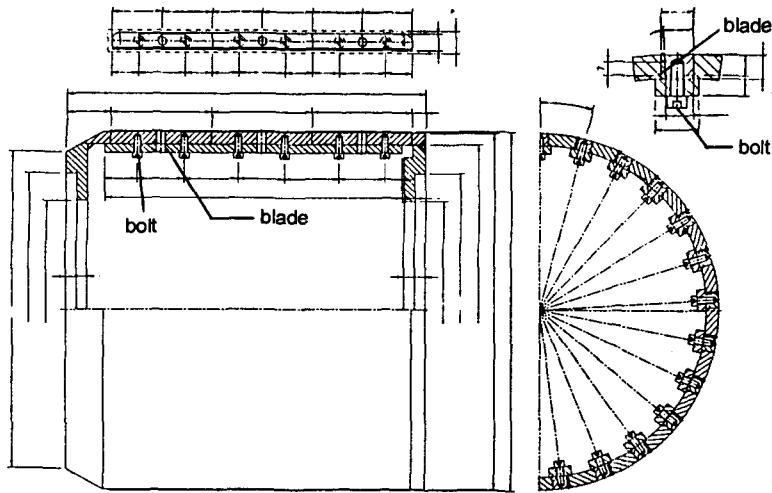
Cutting part with hard metal blades of one-pass rice whitener.
